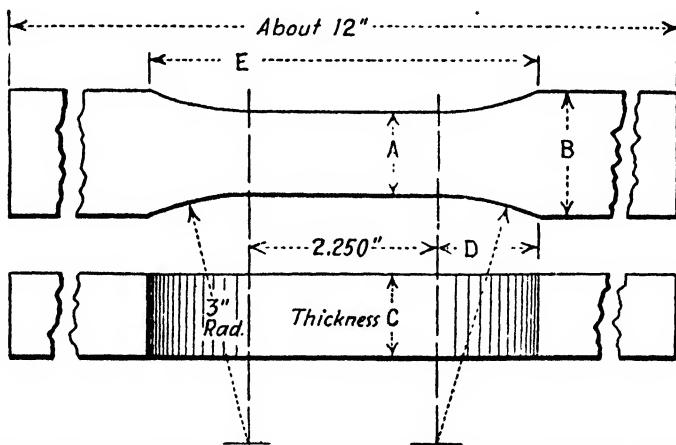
Tension Test Specimen for Laminated Sheet Insulating Materials.
